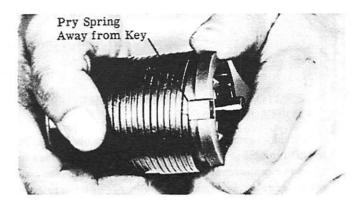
Removing and Installing Forward-Reverse Spring on Trunnion Carrier
